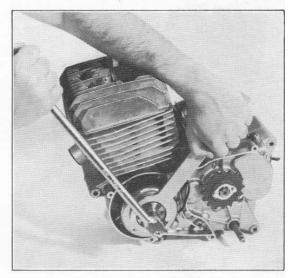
Removing Nut Using Tool to Hold Alternator
